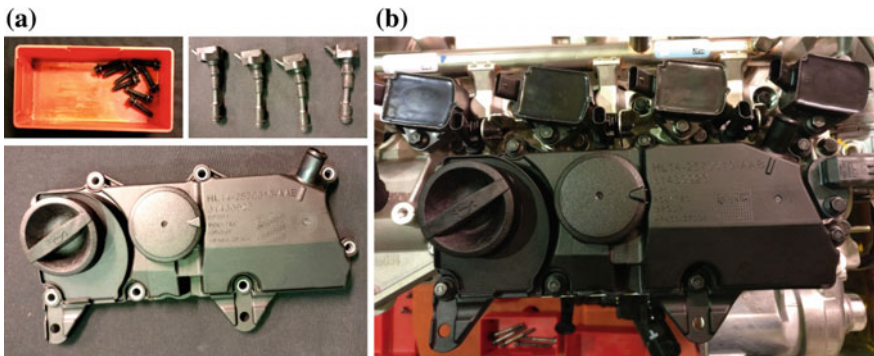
Example assembly task, a parts before assembly; b engine after assembly
